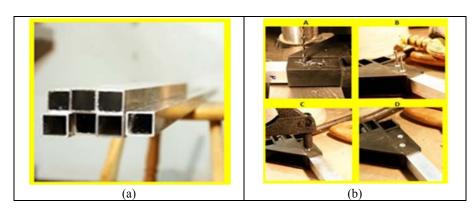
(a) Aluminum square hollow tube (b) Plastic bracket assembled with aluminium hollow square by using rivet.
